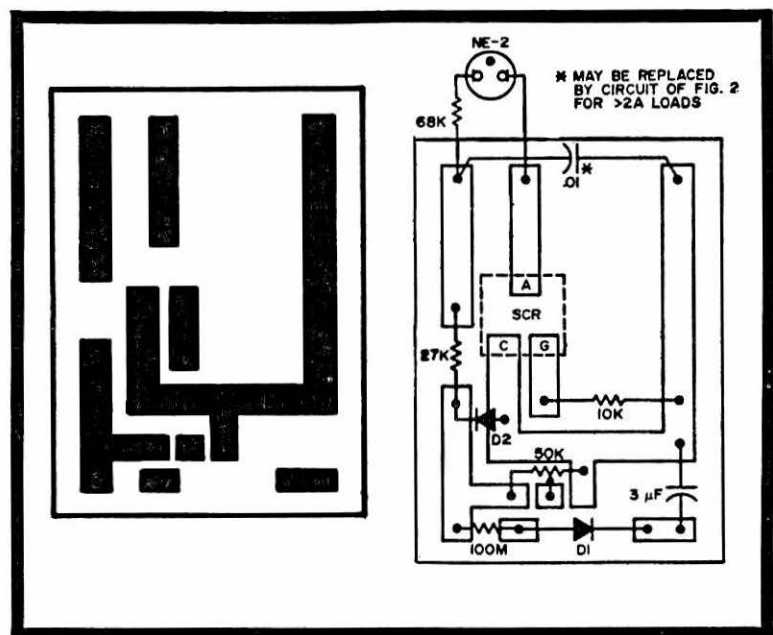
Layout is shown actual-size alongside a composite view which gives component placement data.
